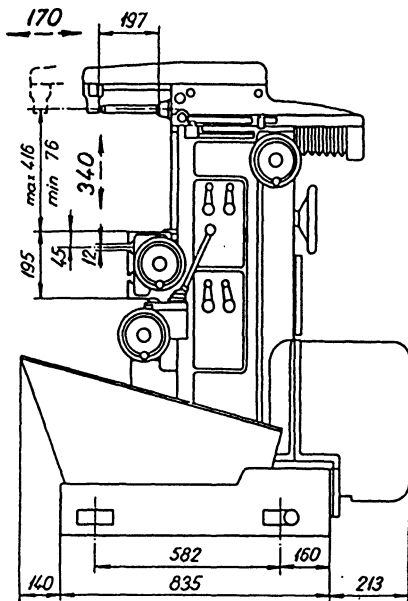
Tool milling machine ALG-100C Figure 2. Tool milling machine ALG-100F
